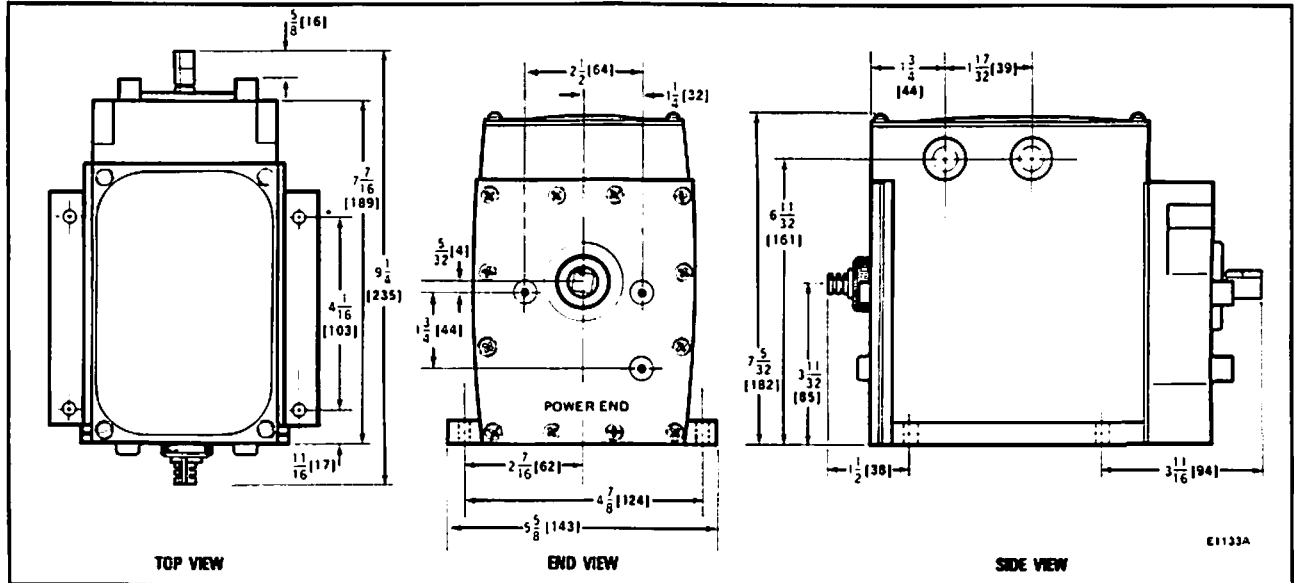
APPROXIMATE DIMENSIONS OF THE M945 MODUTROL MOTOR IN in. [mm IN BRACKETS].
